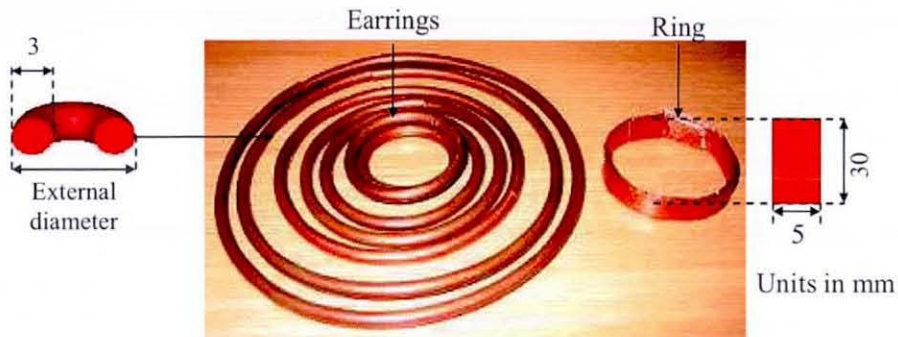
Copper earrings (left) and ring (right) dimensions employed in this chapter.
